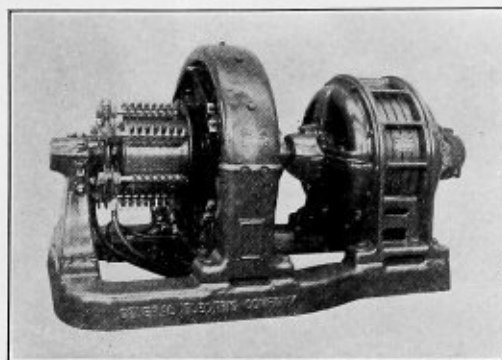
800-Ampere Arc Welding Set, Consisting of Generator Driven by Induction Motor
